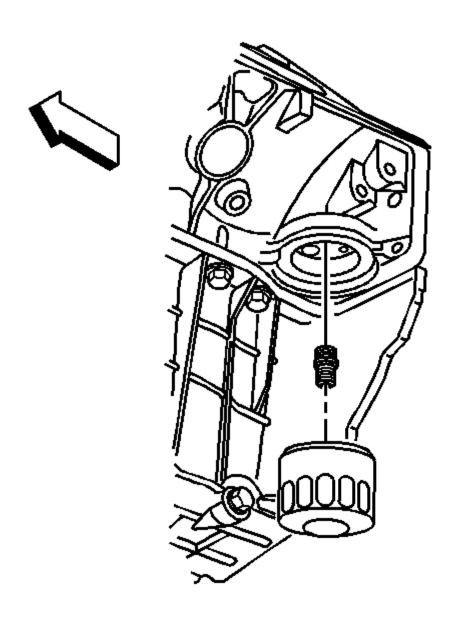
View Of Oil Filter & Adapter Courtesy of GENERAL MOTORS CORP.
